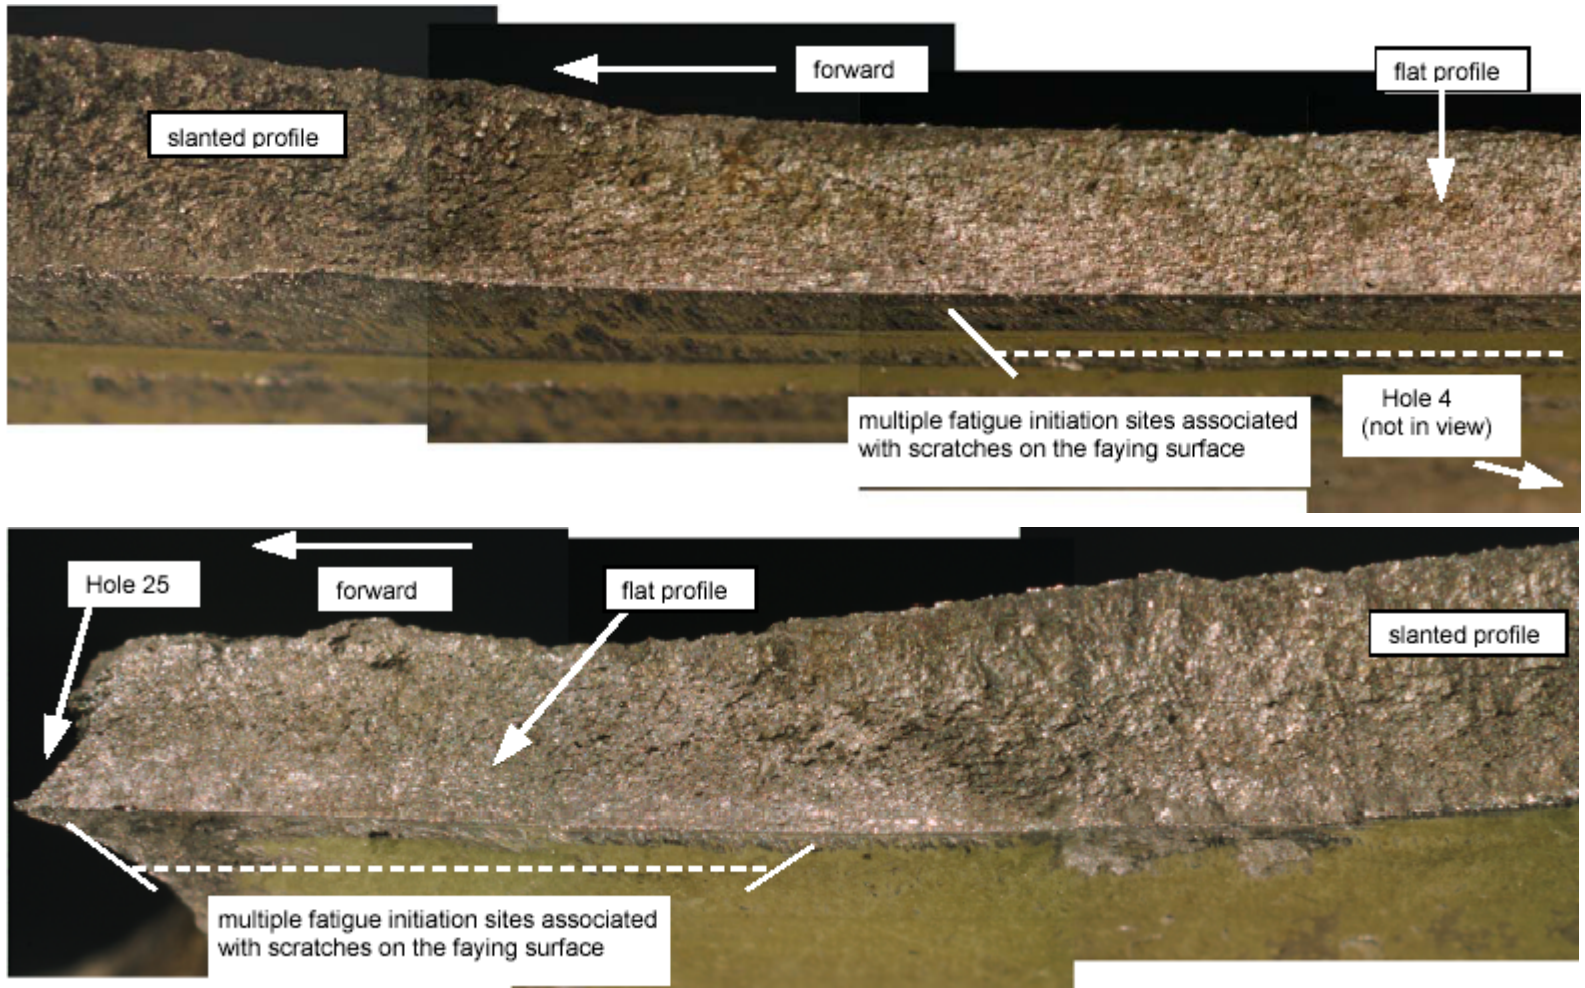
Photographs showing the transition regions from flat fracture profiles to slanted profiles just forward of fastener Hole 4 (top) and Hole 25 (bottom).
